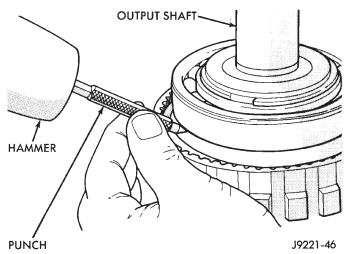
Marking Annulus Gear And Output Shaft For Assembly Alignment
